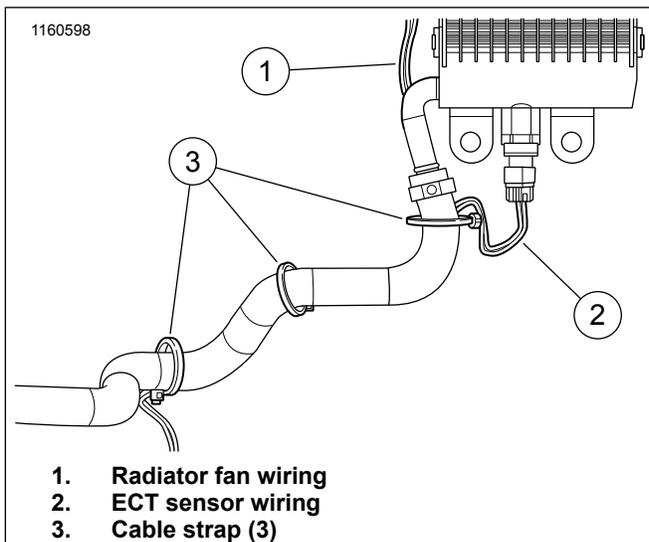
Securing Left Fan/ECT Sensor Wiring to Hose
